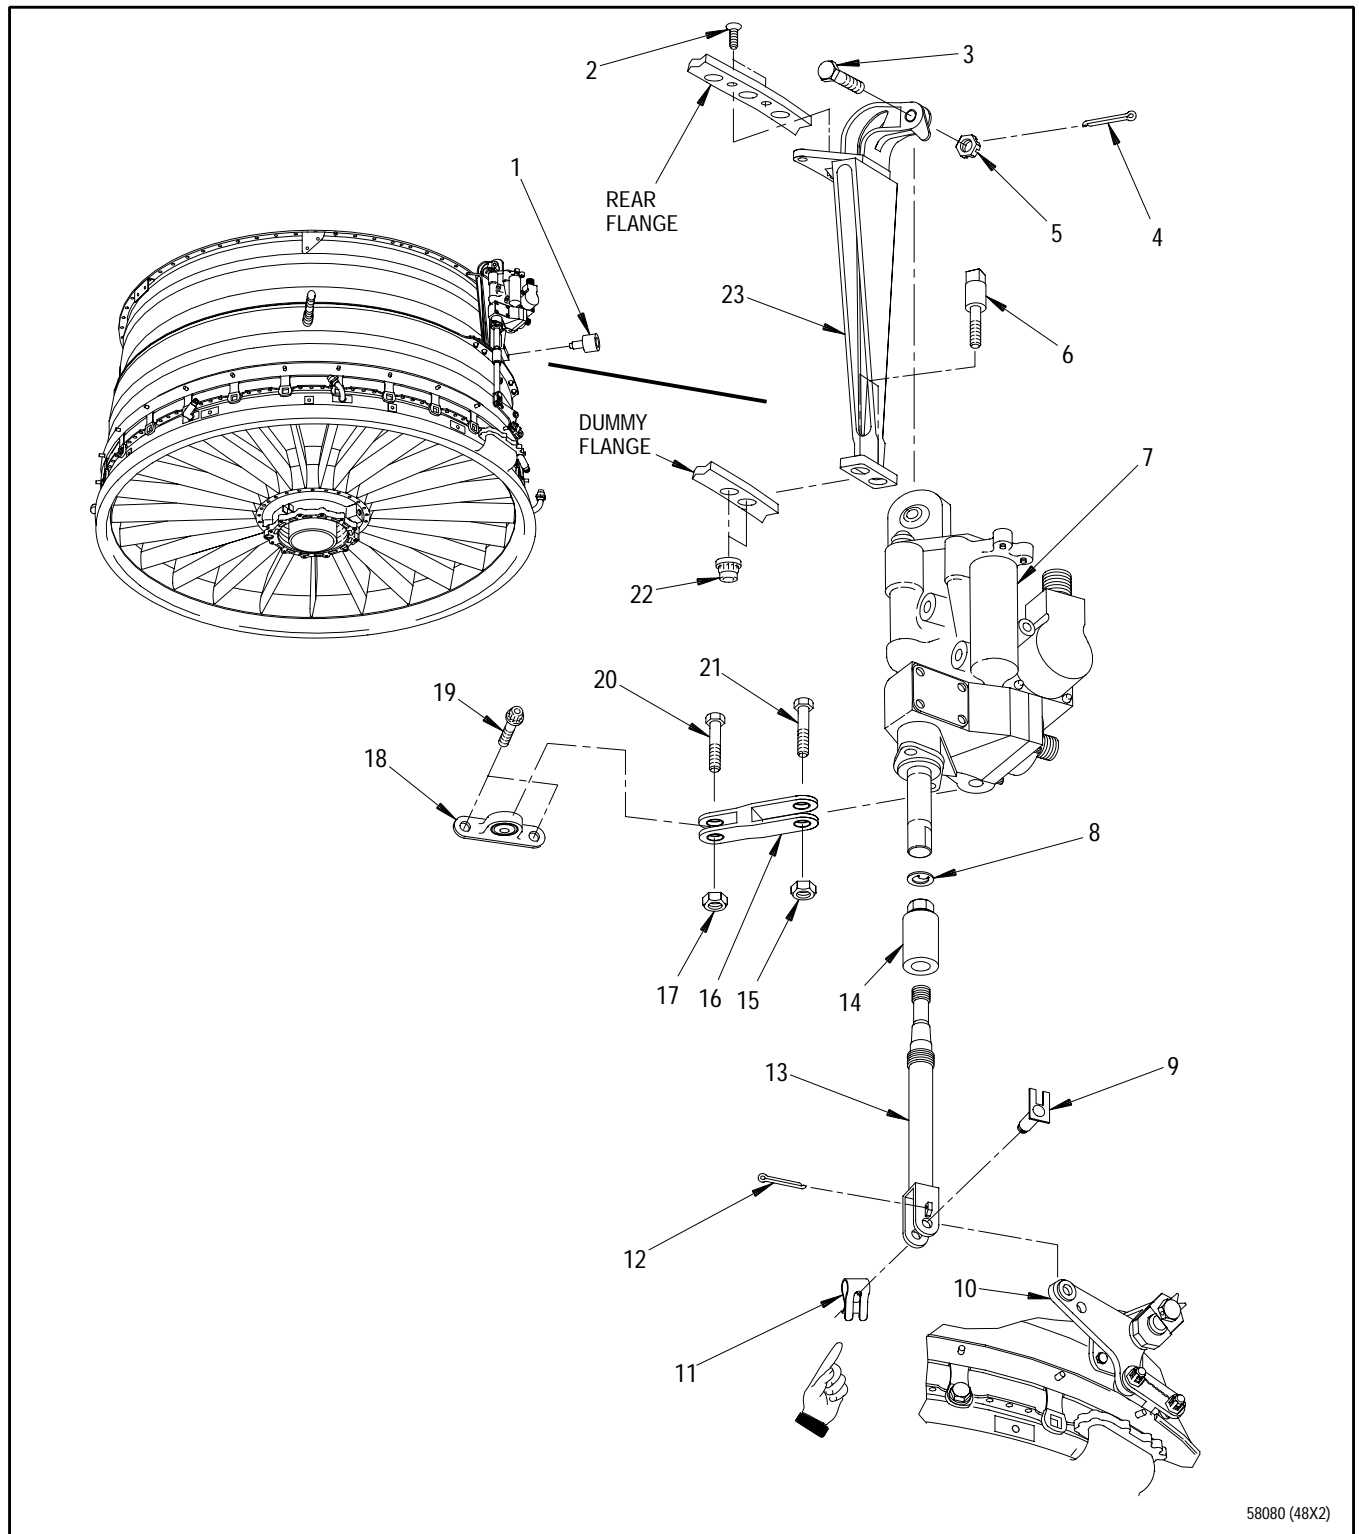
Compressor Inlet Variable Vane Control and Cylinder - Installation
